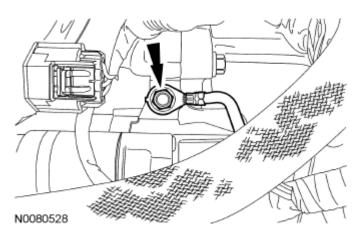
Identifying Battery Cable Nut And Starter Solenoid Terminal Nut Courtesy of FORD MOTOR CO.
